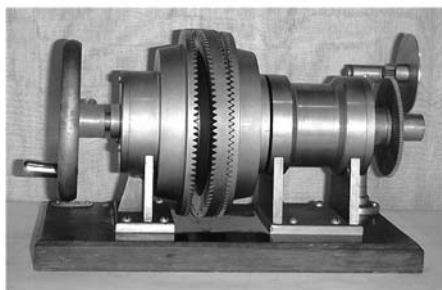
Model of a two-stage crank-planetary reducer with conic gearing
